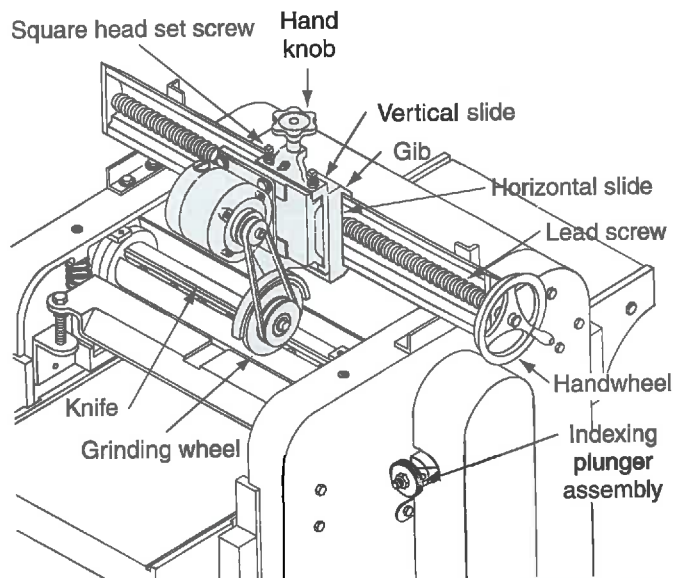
Jointing restores sharpness to dull planer knives. This attachment is bolted to the machine. (Powermatic)
